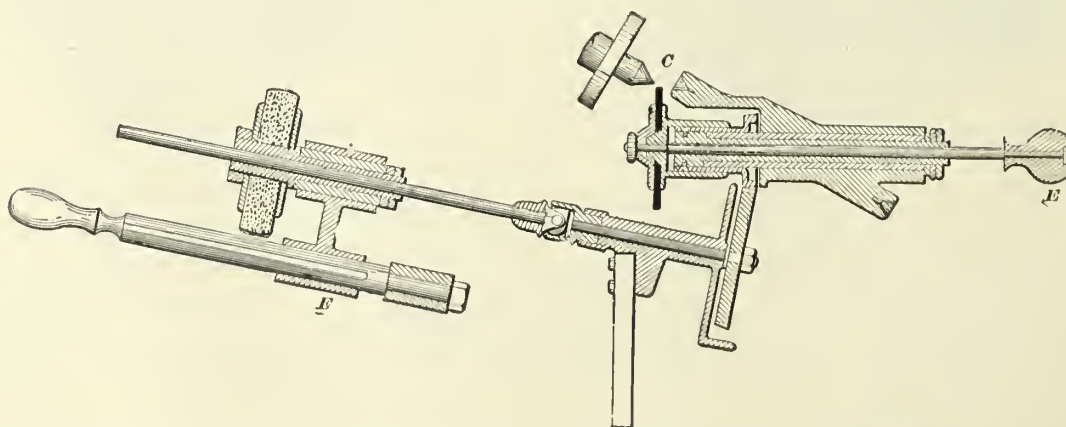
is a section showing the general construction of the machine and its relative position to the center when ready to grind.
